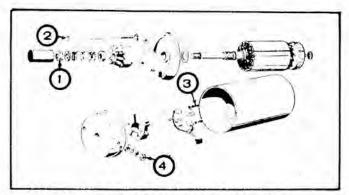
A. STARTER DISASSEMBLY (SPEC. B)
